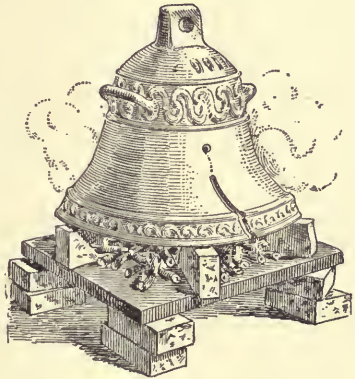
Repairing a bronze bell by autogenous welding.
